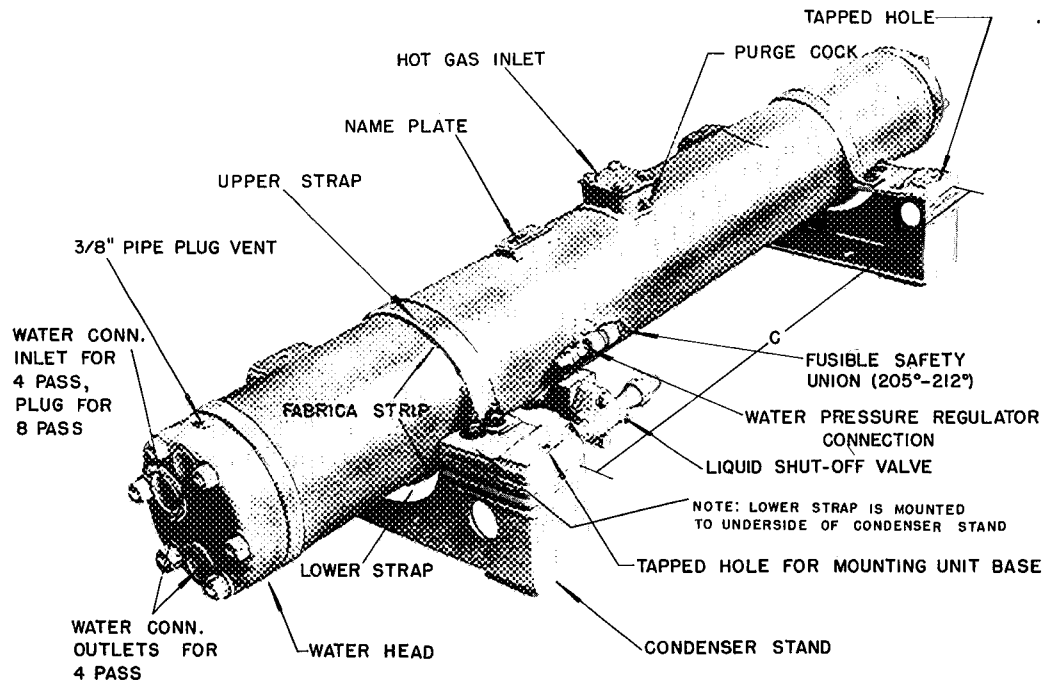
ASSEMBLED CONDENSER PACKAGE
